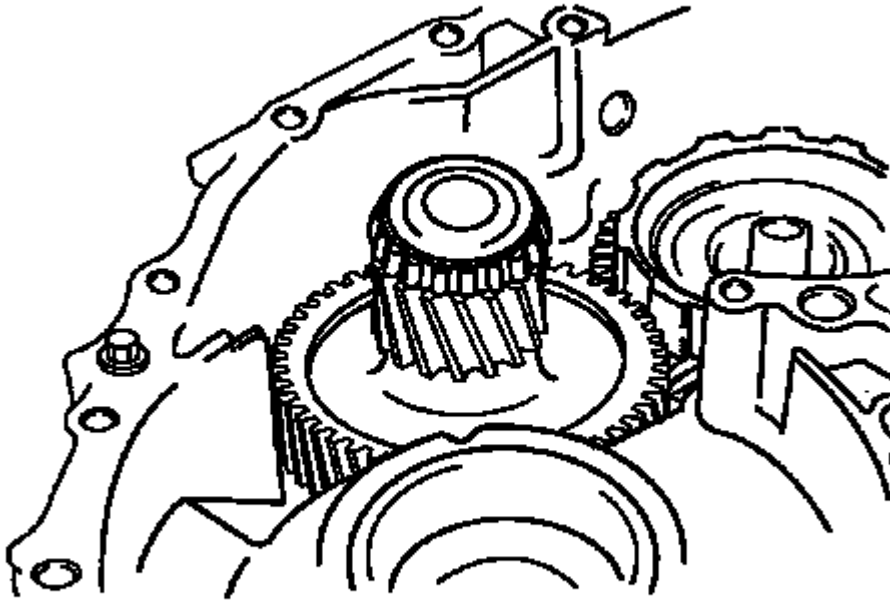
Counter Driven Gear Assembly & Transaxle Case
